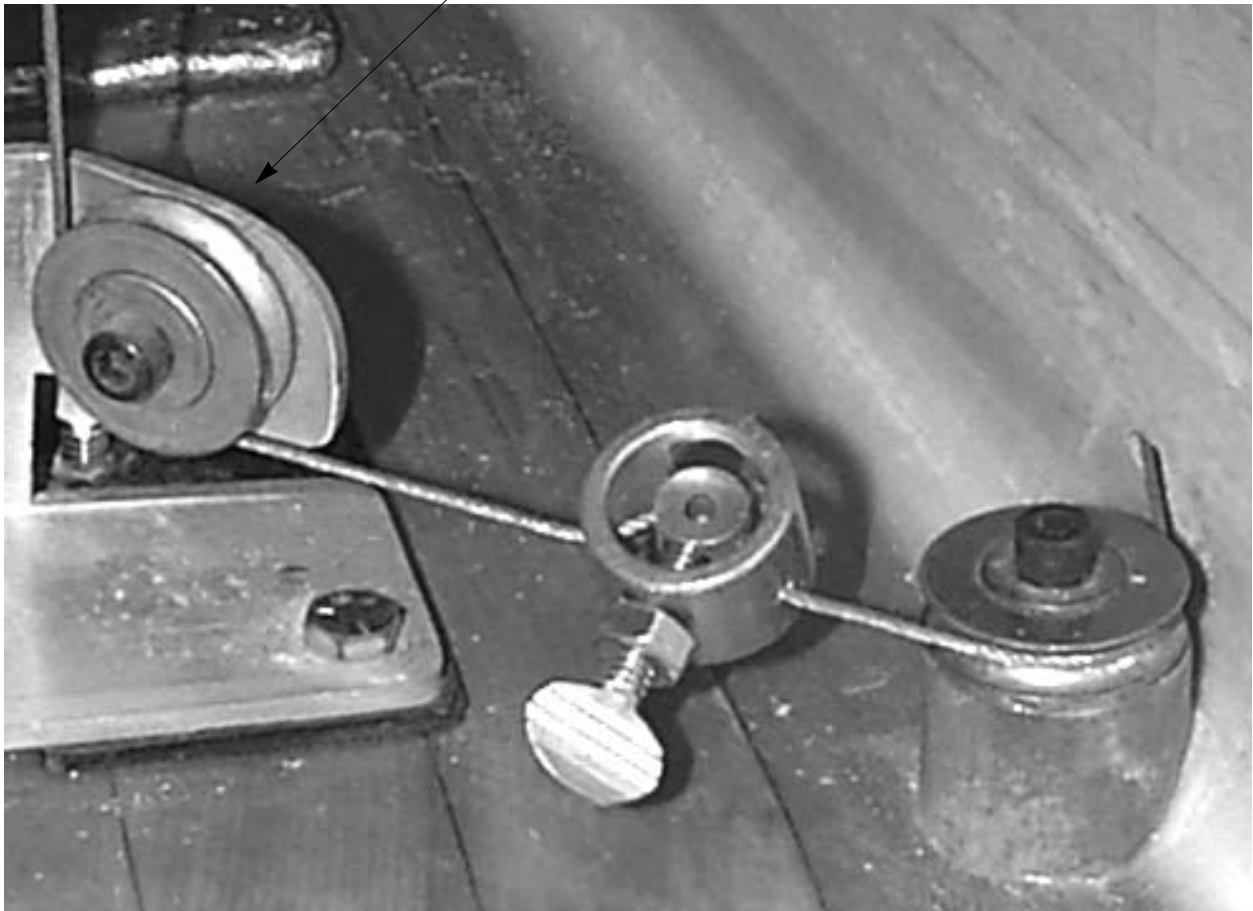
shows a simple way to attach the steering cables to the axle using a drilled-out thumb screw. A small eye bolt will also work well here. It is important that the bolts are turned all the way up against the axle to avoid bolt flex when steering. An inside-the-car cable adjustment method will be needed to center the steering and tighten the cables. Small turnbuckles can be used for this, or you can build a low-cost adjuster as in Figure 9.3.
